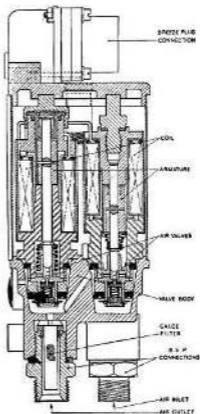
Sectional view of electro-pneumatic valve, Type FDH
